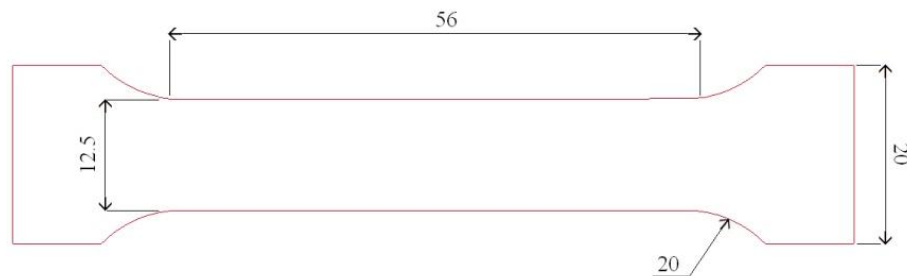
Geometry of tensile test sample (all dimensions are in mm)
